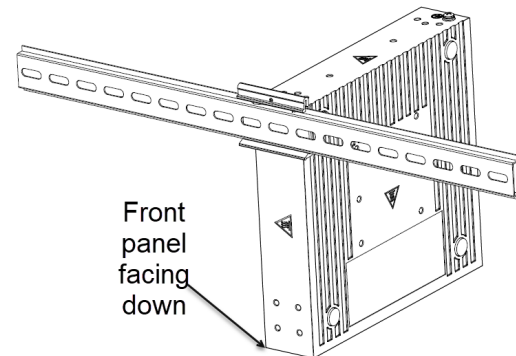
DIN Rail Mounting Option 2: Secure the Port Extender
